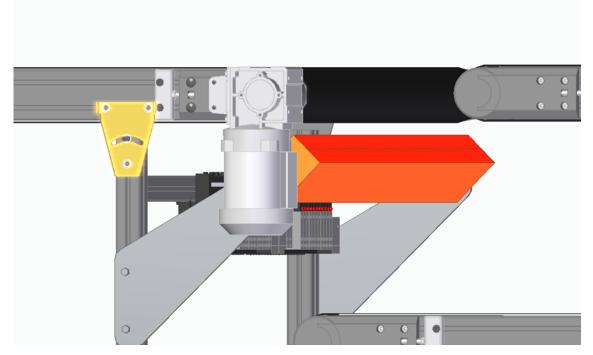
3D model of separation module. On the right there are two conveyor lines, upper for separated white paper, and lower for other materials. The nozzle block is in the middle right under the end of first conveyor.
